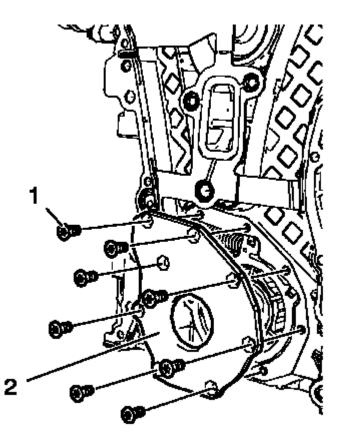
Locating Engine Front Cover Components Courtesy of GENERAL MOTORS COMPANY
